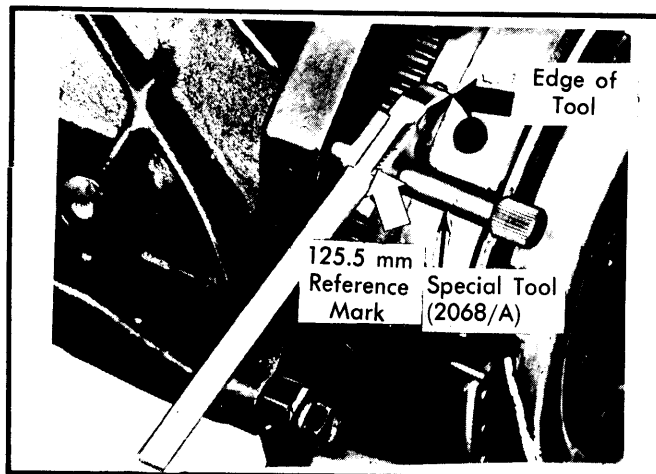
Adjusting No. 1 Cylinder to TDC With Engine Removed (Audi Shown)
